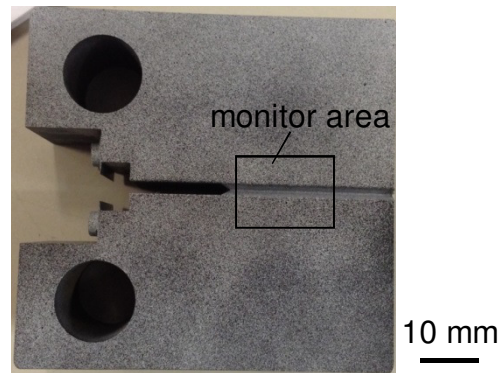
Side grooved C(T)-specimen extracted from S355 BM with a surface pattern.
